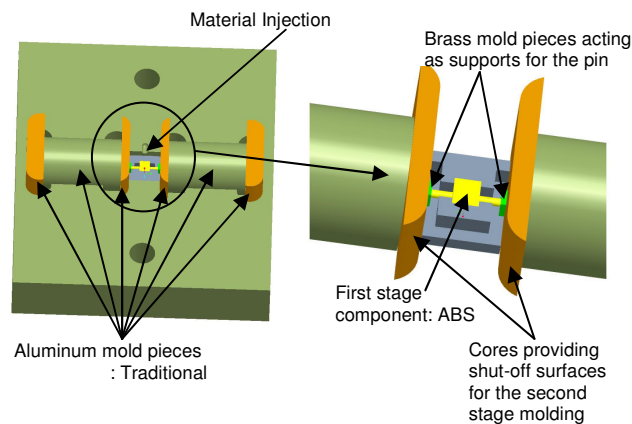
MOLD ASSEMBLY FOR STAGE 2.
